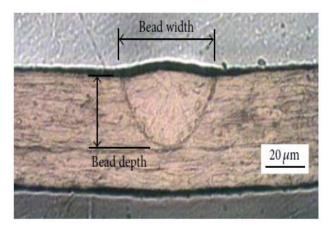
Weld bead profile of bead on sheet joint
